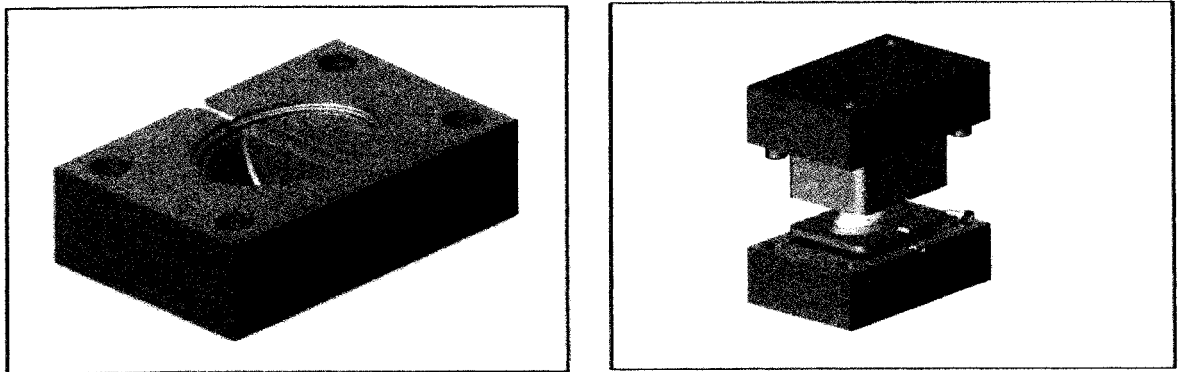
Mould tool design of mould (female) and total tooling for Millennium Bridge
